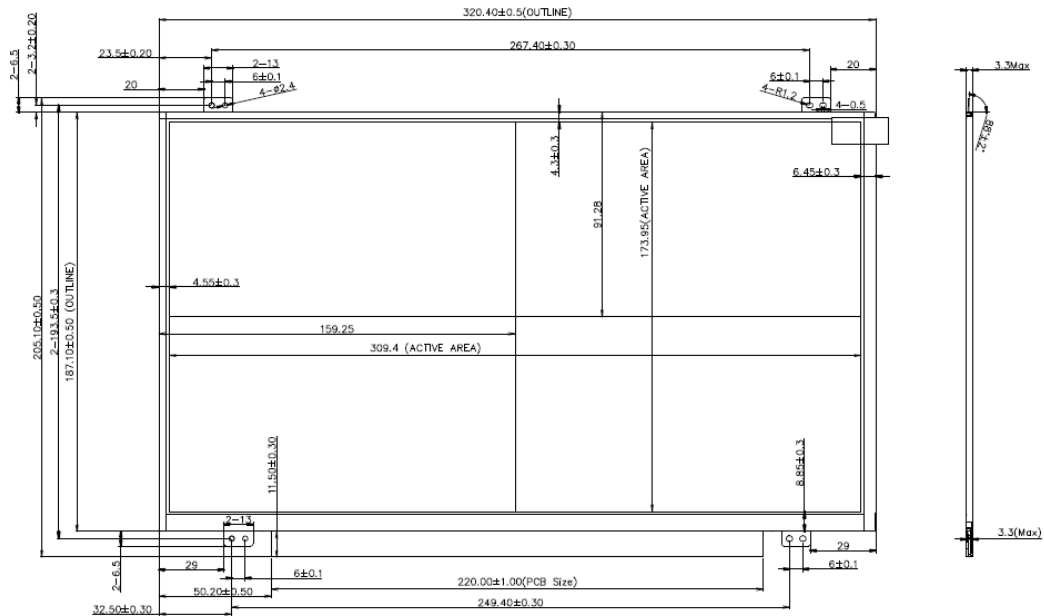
TFT-LCD Module Outline Dimension (Front View)
